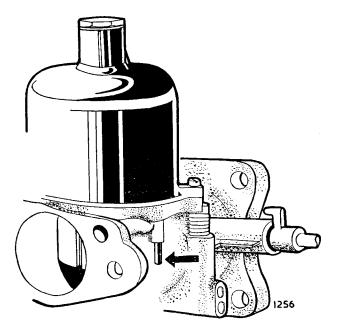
The carburetter piston lifting pin; the first part of the movement is spring loaded free travel.
